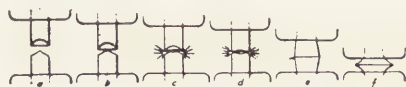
Stages in the Process of the Electro-Percussive Weld.
